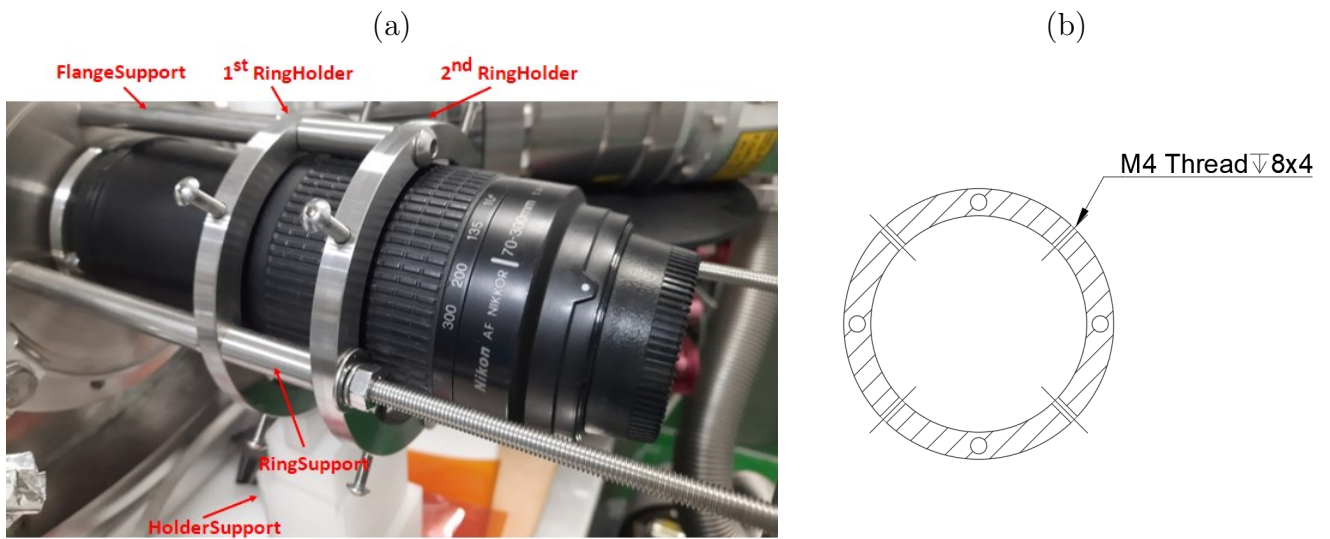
(a) The LensHolder. (b) The cross section of RingHolder.
